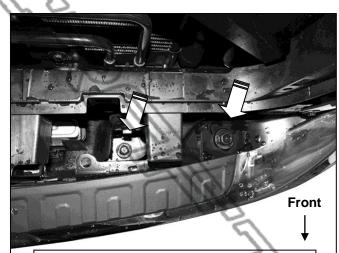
Remove grille to access bumper bolts (Fig 4)
